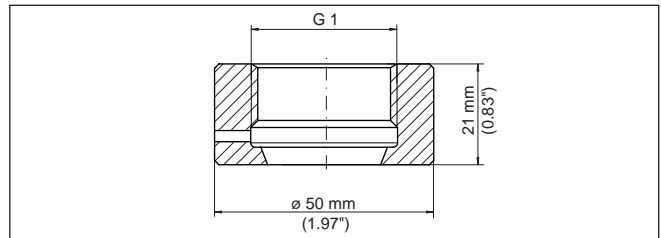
Dimensions direct welded socket G1 - Cone seal
